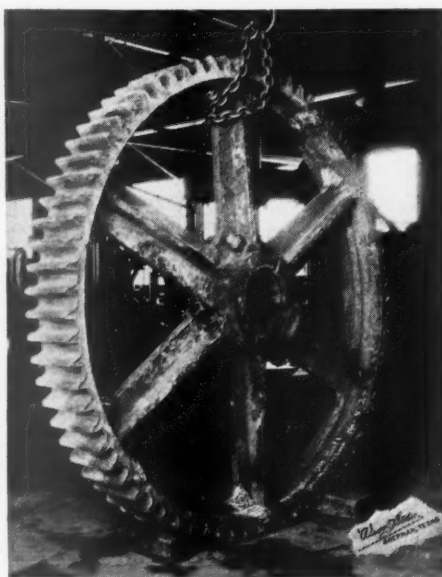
This gear was broken in an accident into several pieces and successfully welded
